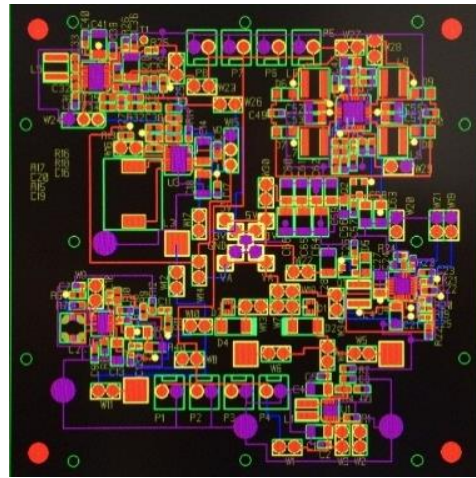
Printed Circuit Board (PCB) [8] designed by Mihai Totu for the new EPS
